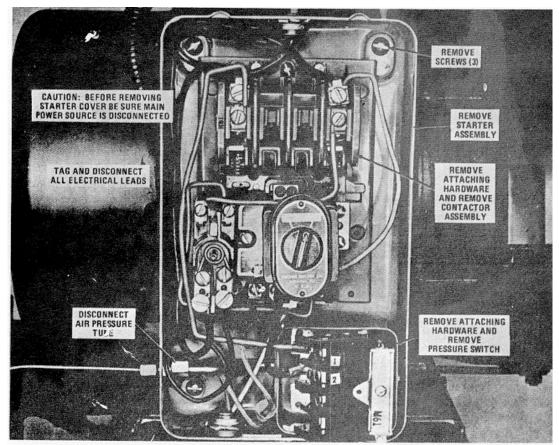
Magnetic starter with pressure switch, removal and installation (shown with cover removed)
